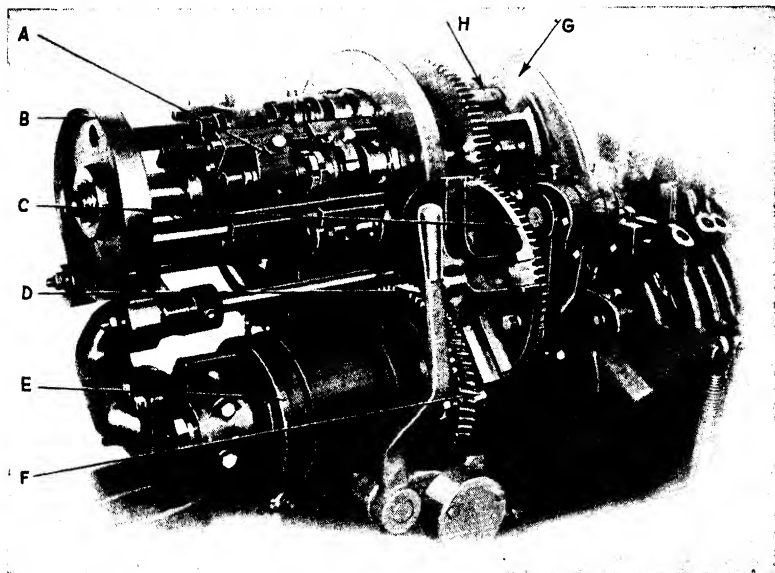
Davenport work-spindle head. A, Feed tube outer bearing. B, Outer support for revolving head. C, Geneva disk, hardened and ground slots. D, Worm wheel. E, Chuck and feed cam. F, Roller Geneva crank. G, Locating lever. H, Locating blocks.
